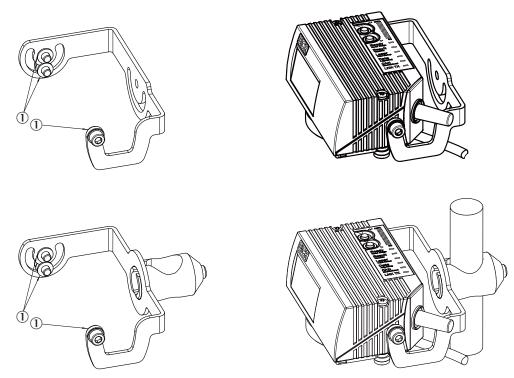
Mounting examples for device with heating: Mounting via bow-shaped mounting bracket (SICK accessories). Illustration of the device may differ.
